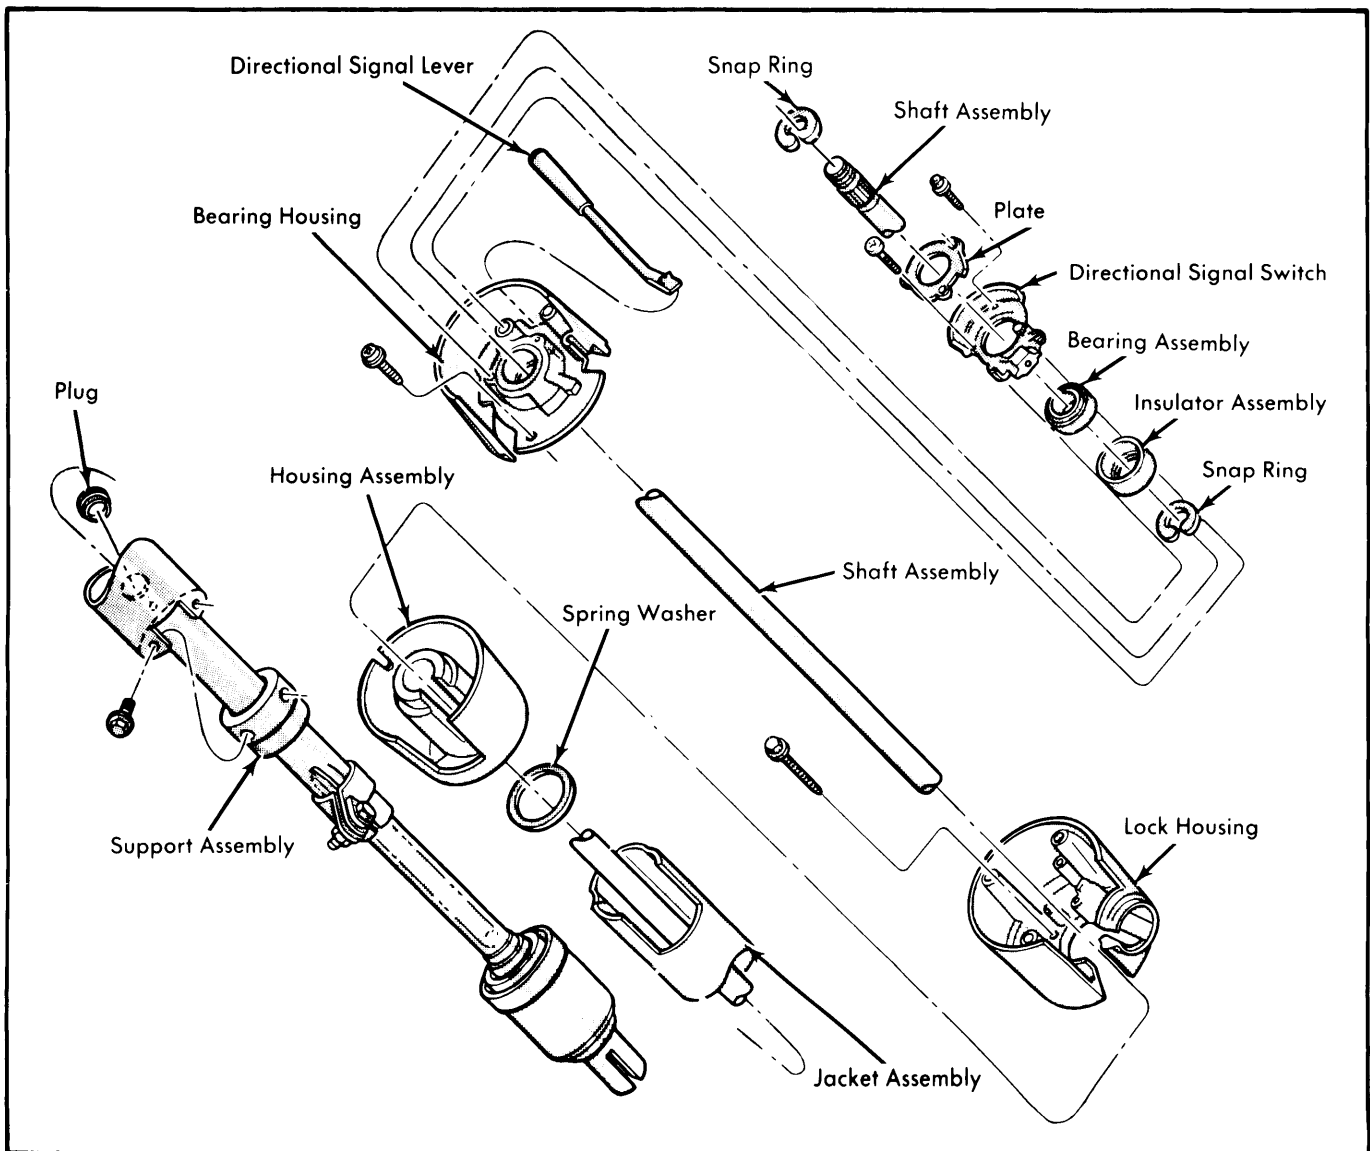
Disassembled Steering Column Assembly ("M" Models)
